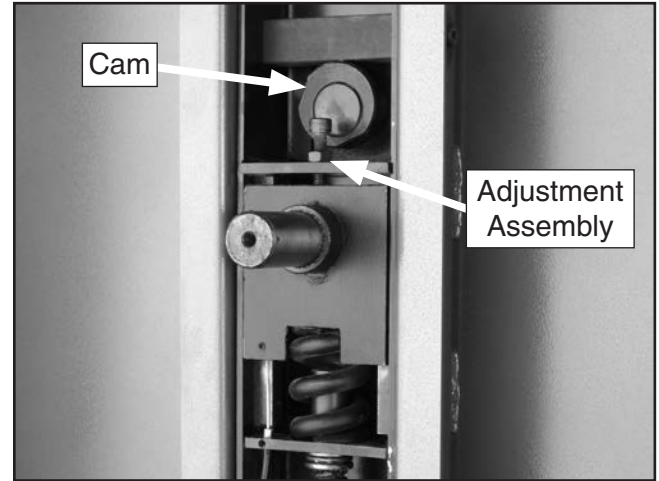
Example of tension adjustment assembly locations (top wheel removed for clarity).
